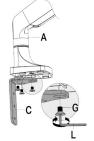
Attach Angled Bracket (C) to Microscope Arm Assembly (A).
